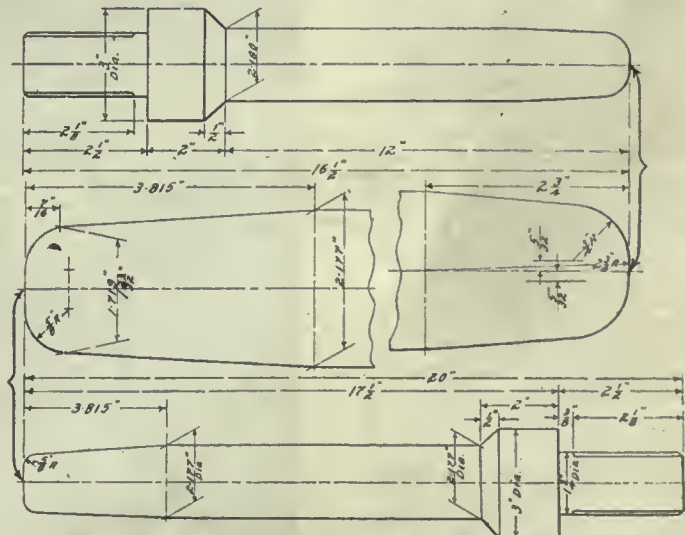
PIERCING AND DRAWING PUNCHES FOR 75MM. FORGINGS.
